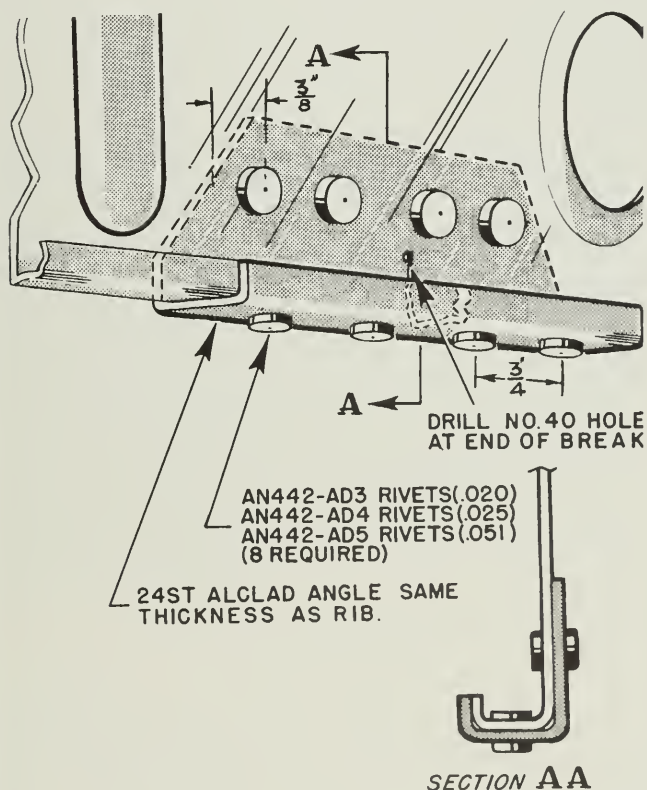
Typical Rib Flange Repair Where Flange Is Not Riveted to Skin
